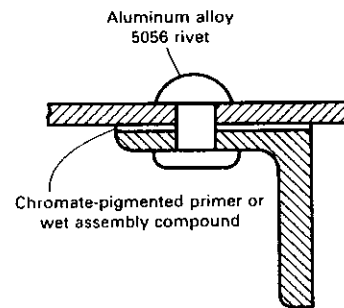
Schematic of the proper method of protecting faying surfaces in magnesium-to-magnesium assemblies
